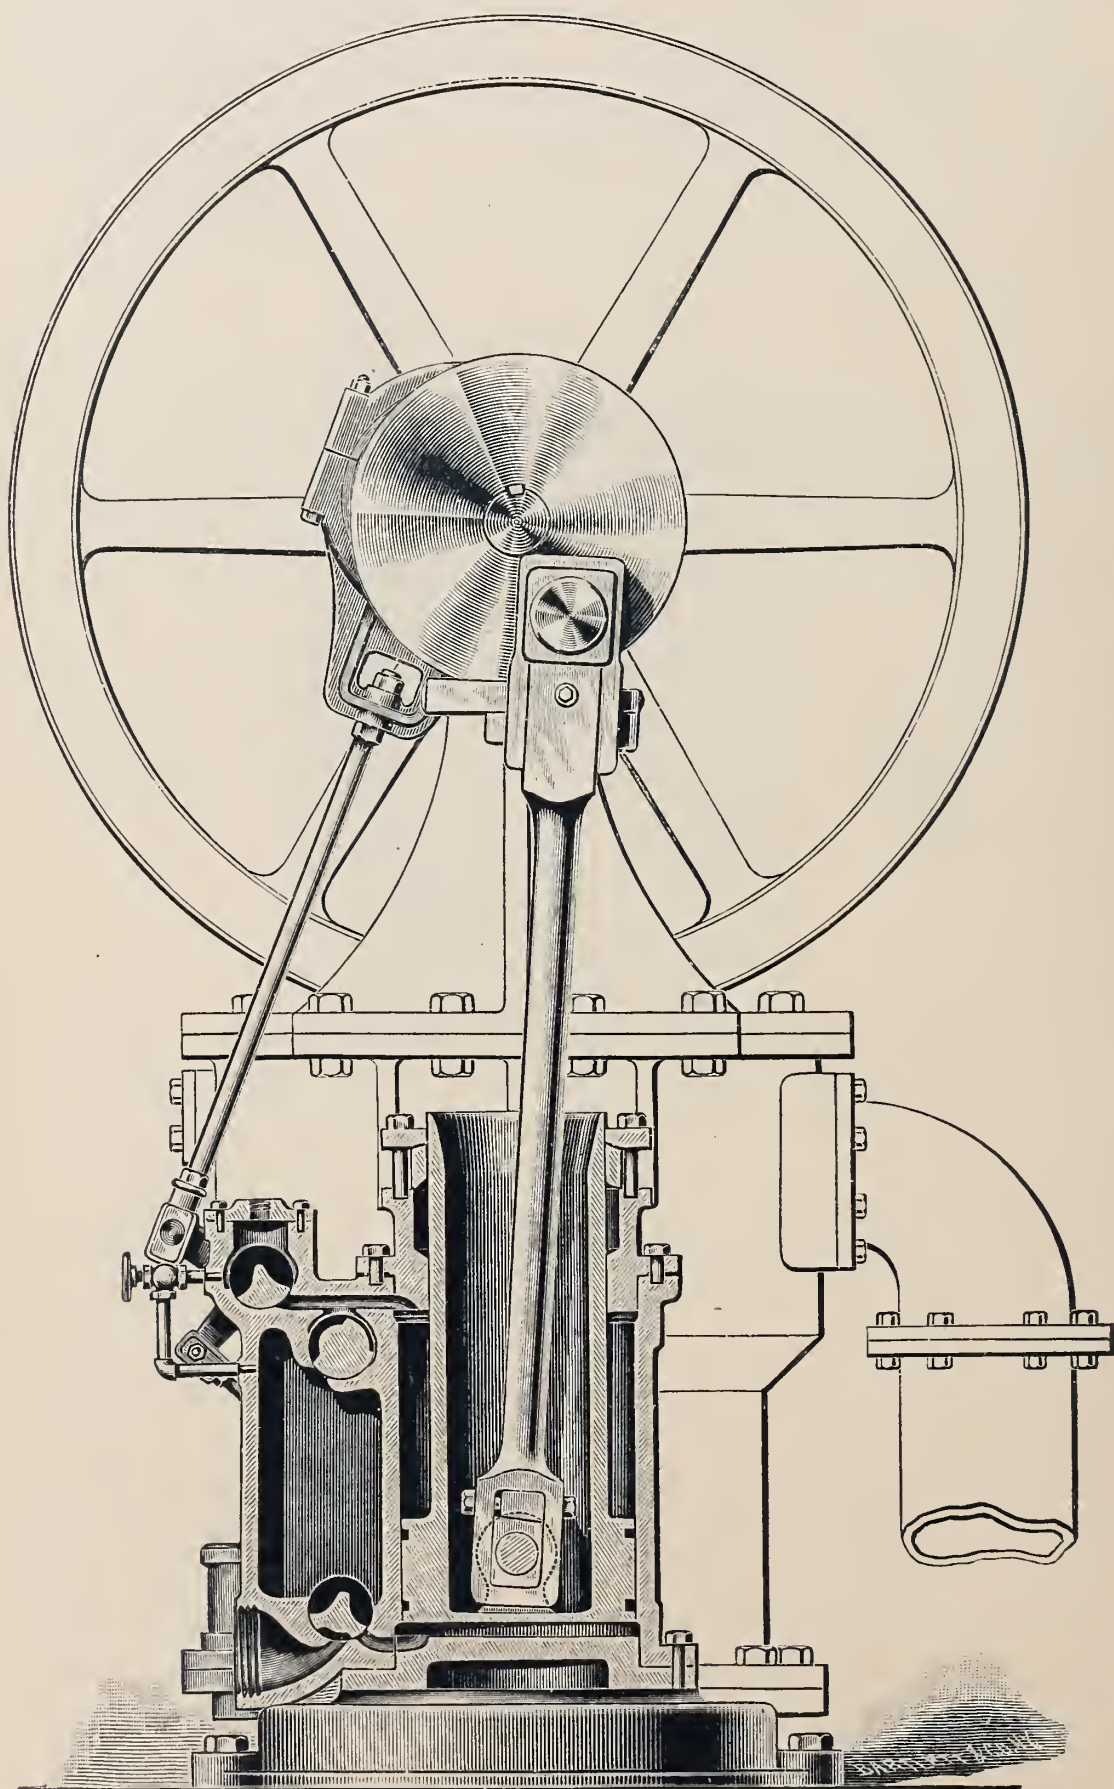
SECTION THROUGH THE ENGINE VALVES.
